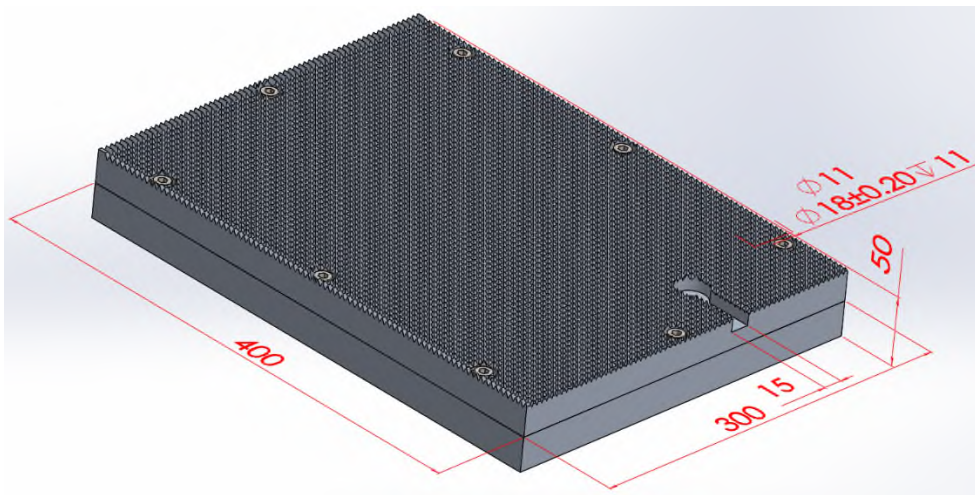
The plan view schematic diagram of the lower shear box and heating elements (mm)
